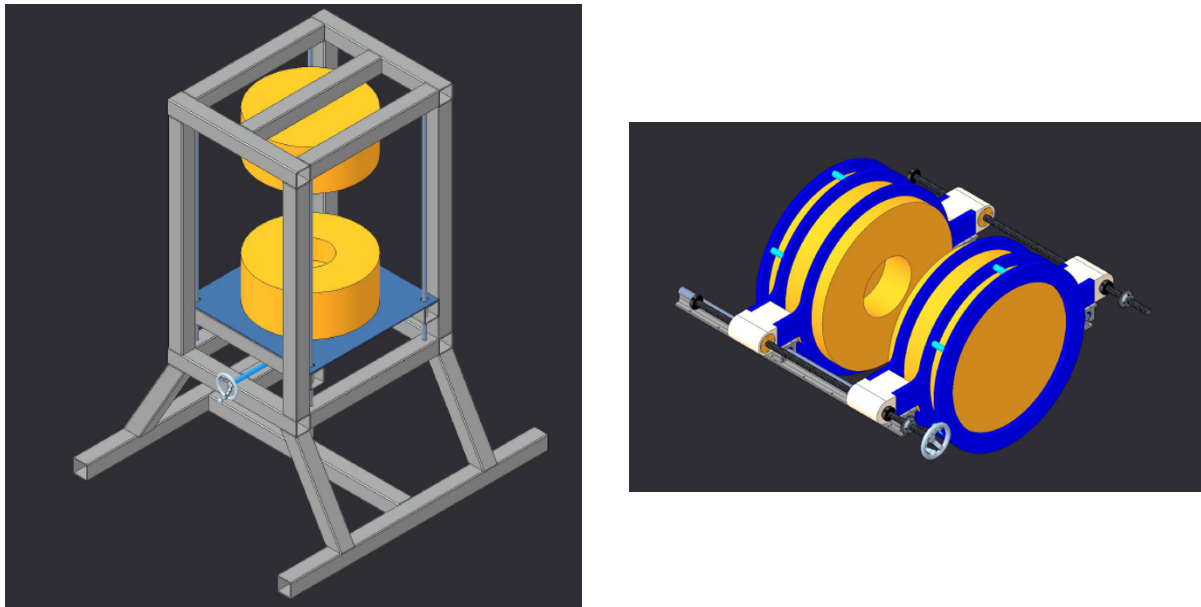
Preliminary mechanical designs of the ORSA assembly—vertical lift (left) and horizontal split (right).
